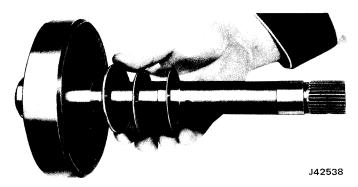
Installing Thrust Bearing and Bearing Races On Main Shaft
